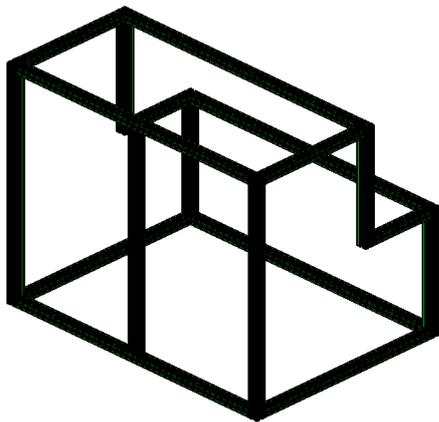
Aluminium Frame constructed using aluminium Extruded Profile
